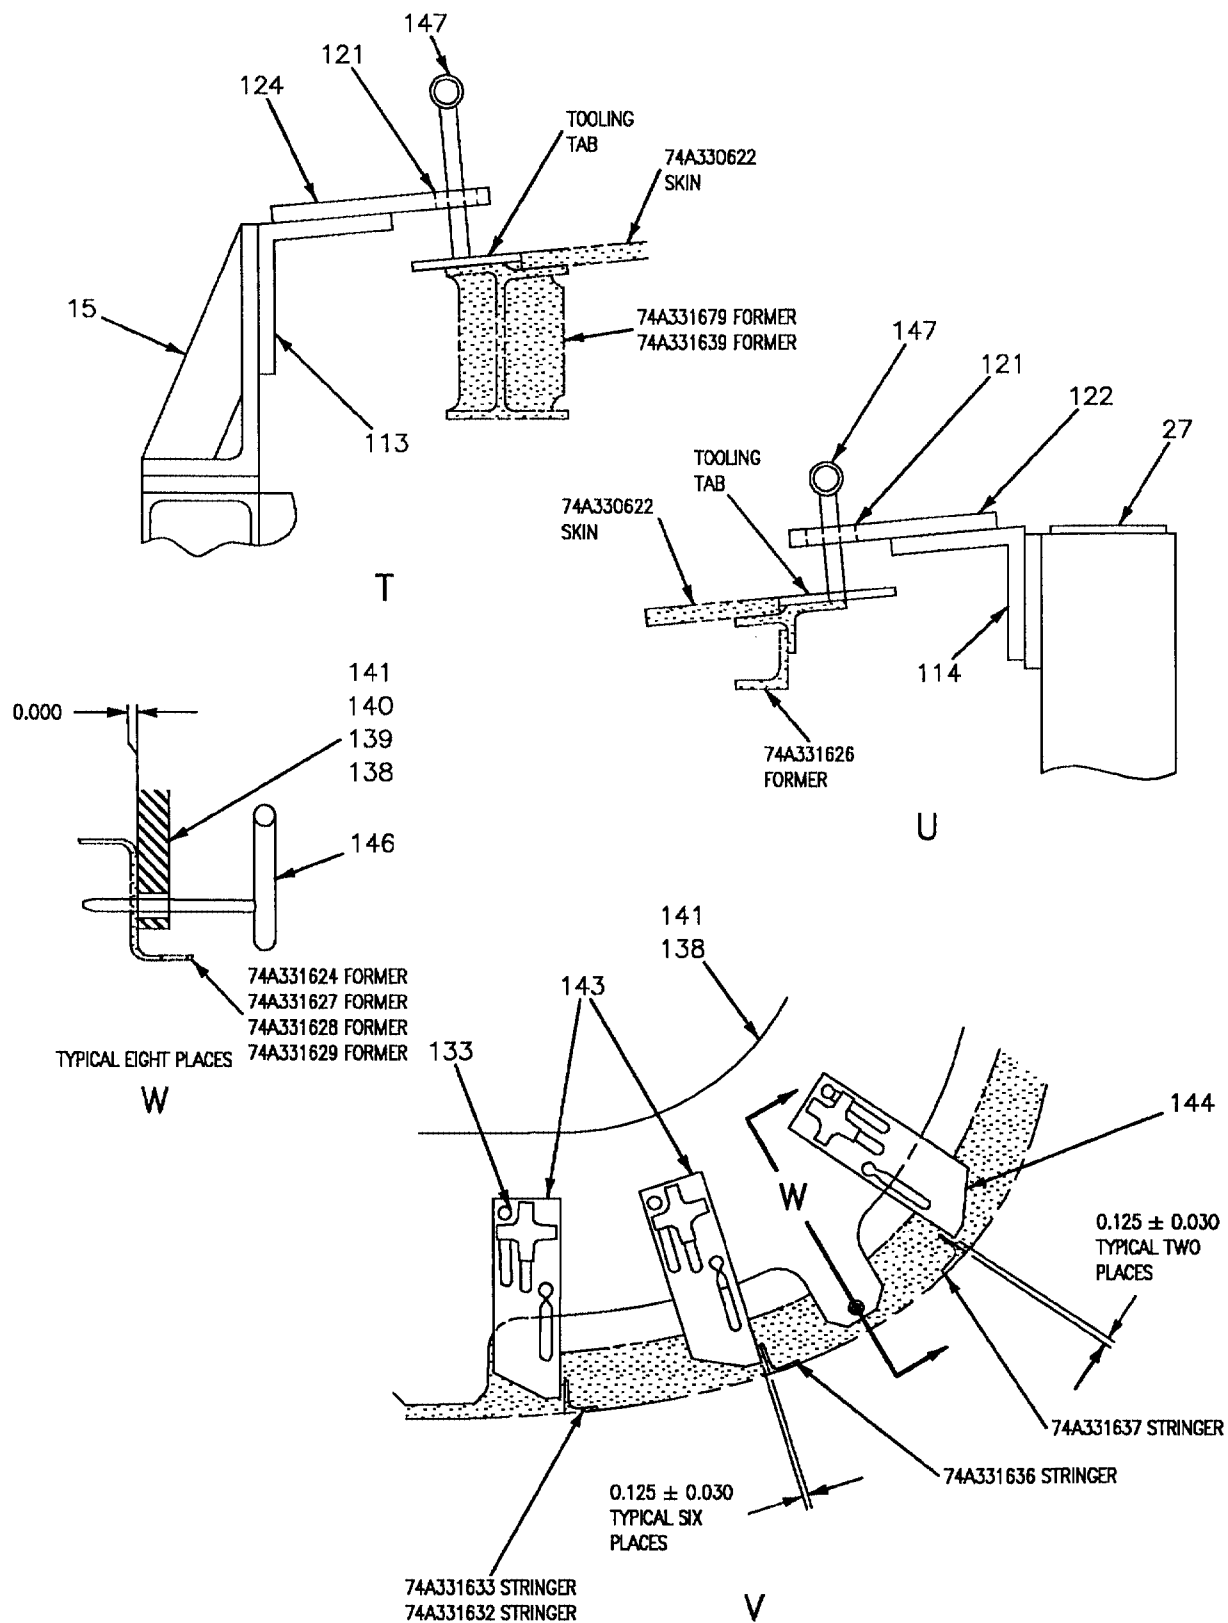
Maintenance Fixture RE174330621-1, -2 Details for Skin and Formers Replacement (Sheet 6)
